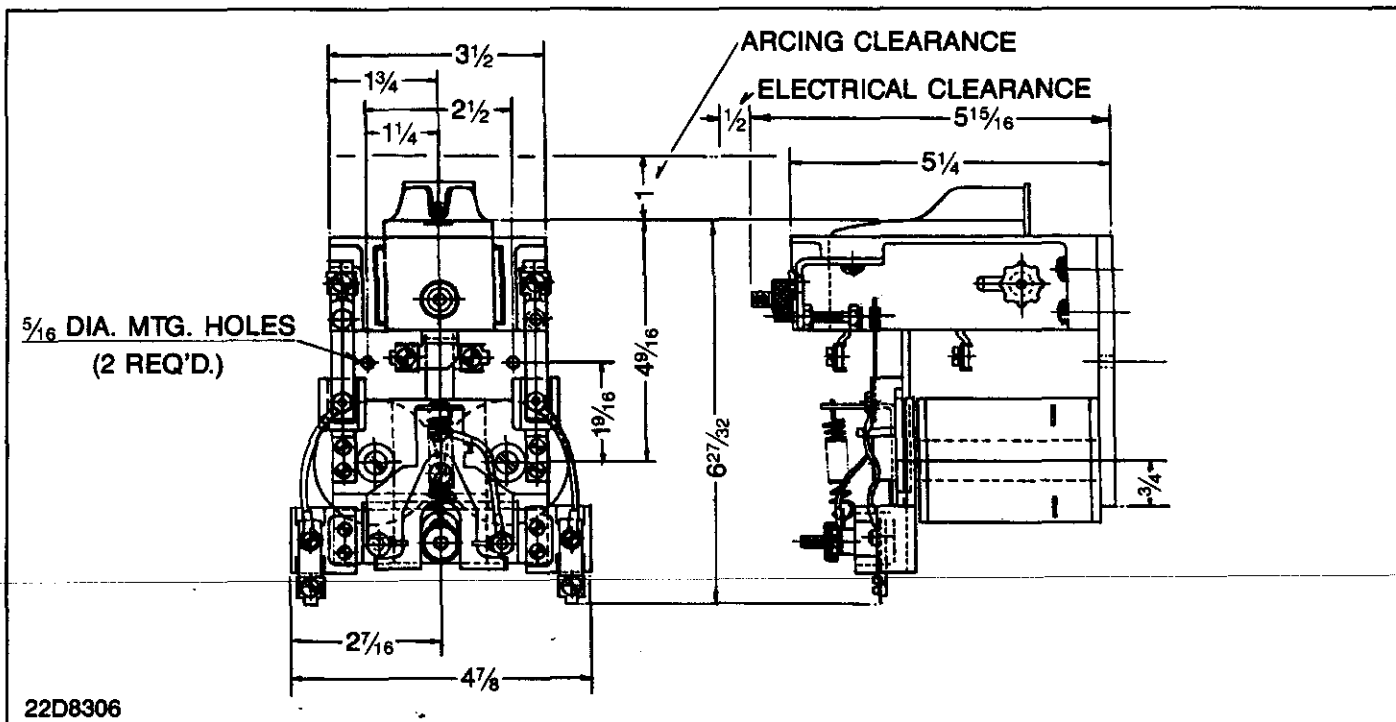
Outline and Mounting Dimensions (Dimensions in inches)
